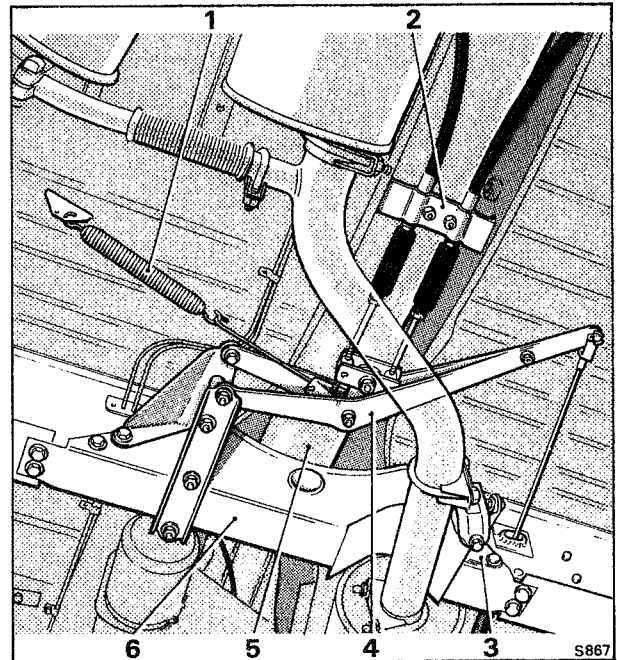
Centre crossmember and parking brake linkage. Right hand drive car.
